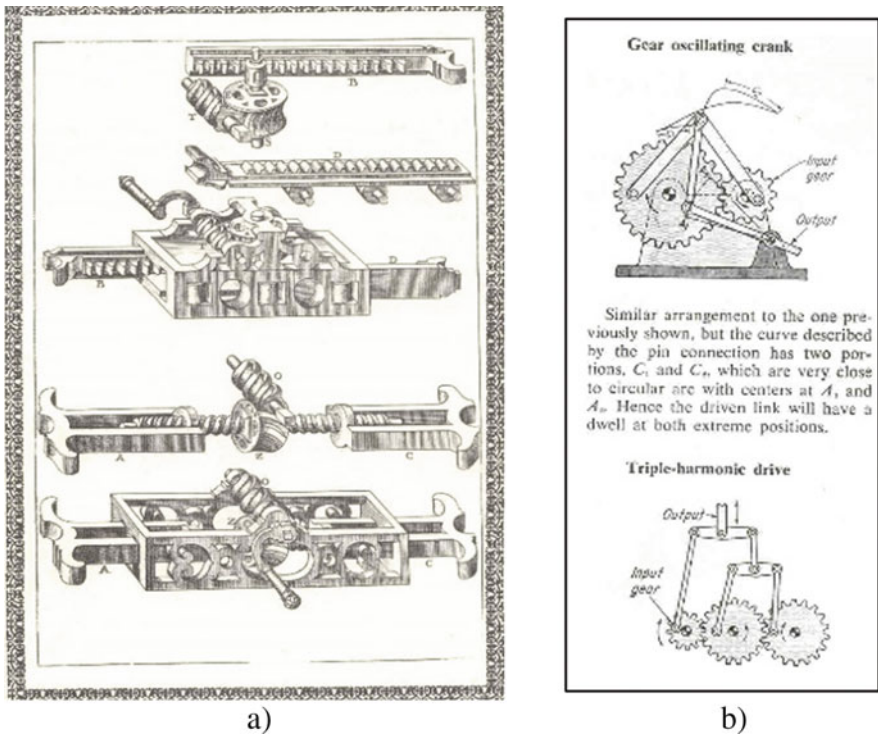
Examples of collections of geared transmissions in: a first handbook of mechanical designs by Agostino Ramelli in 1588 [11]; b a modern handbook of machine design [12]
